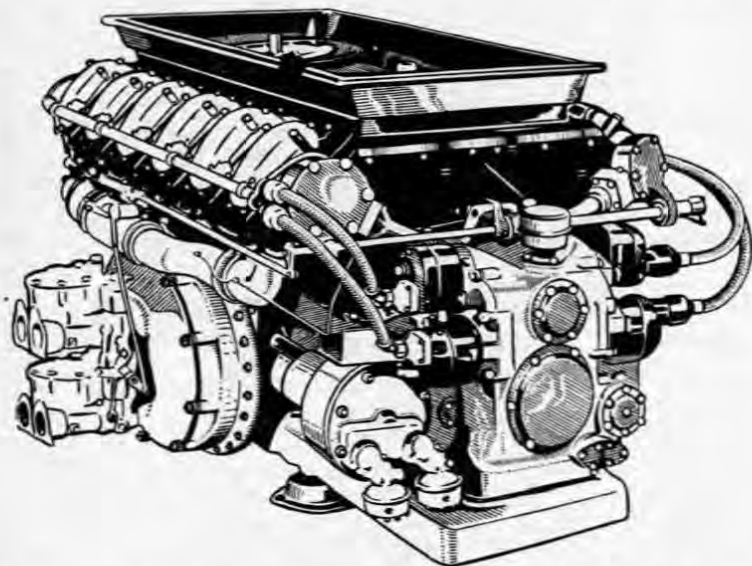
Twelve-cylinder supercharged Continental AVS - 1790 - 5 engine.
